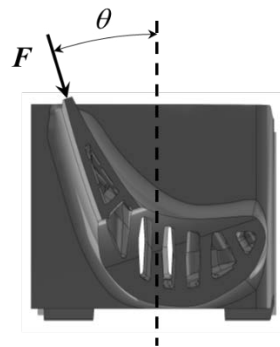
Schematic representation of the blade machining for obtaining the final TA geometry.
